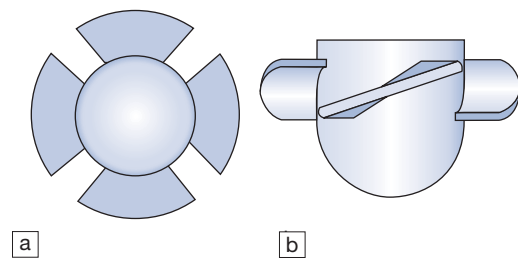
Design of four-vane impeller. (a) Top view, (b) side view.
